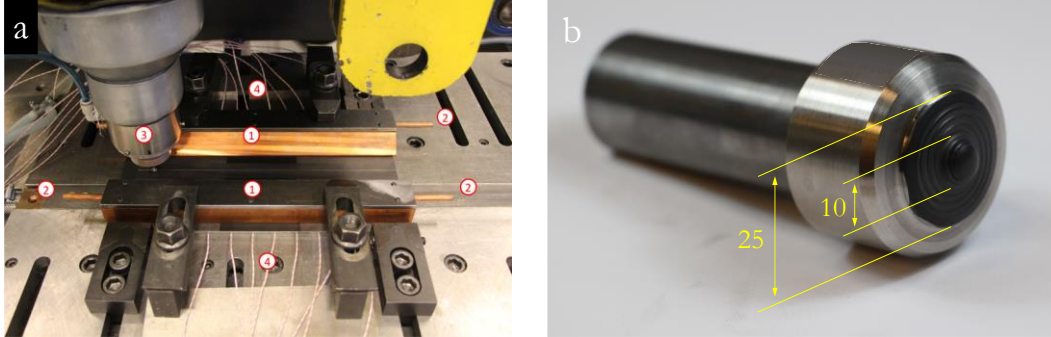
Welding setup and tool for FSW: a) Details on the clamping system and temperature measurement setup including: 1 - water cooled clamping elements; 2 - water cooled anvil; 3 - shielding gas nozzle; and 4 - thermocouple cables; b) FSW tool with shoulder and probe base dimensions.
